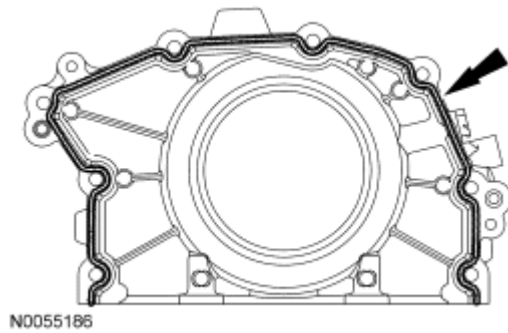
Applying Bead Of Motorcraft High Performance Engine RTV Silicone To Sealing Surface Of Crankshaft Rear Seal Retainer
